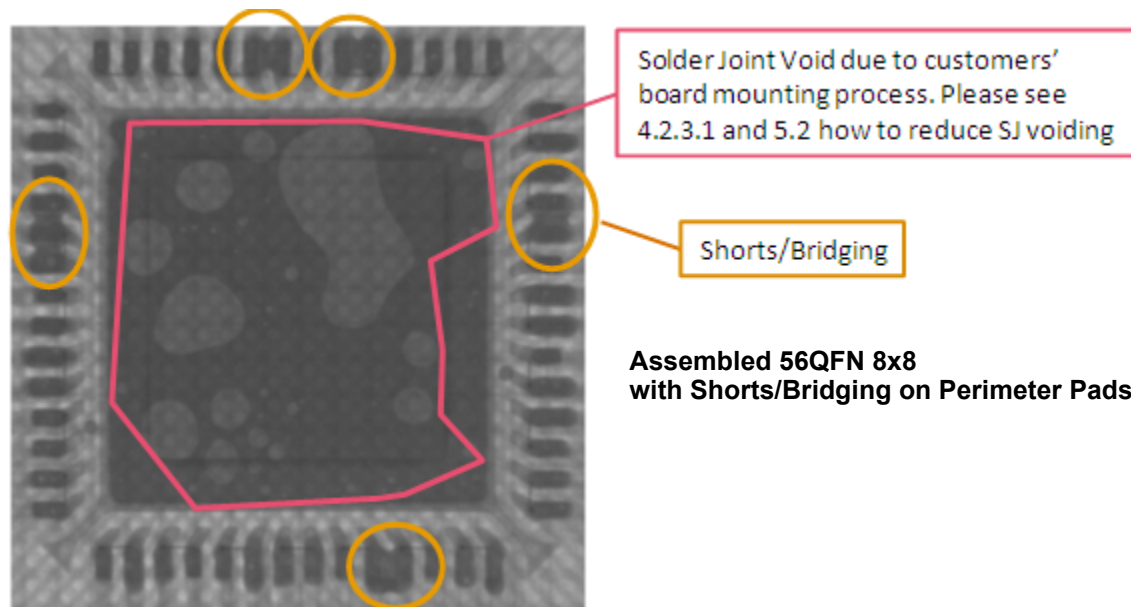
X-ray of QFN Package with Shorts/Bridging Defects
